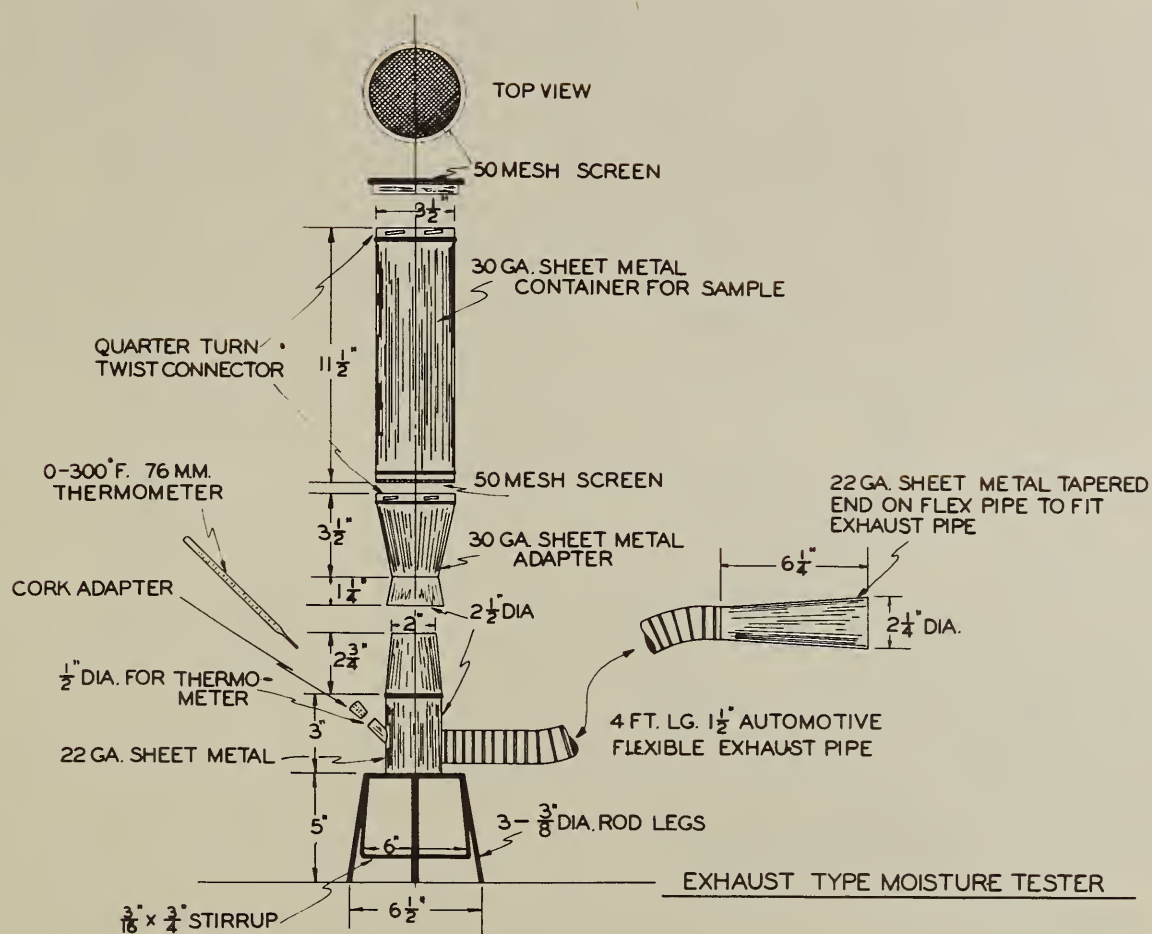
Drawing of exhaust type moisture tester, showing parts and dimensions.
